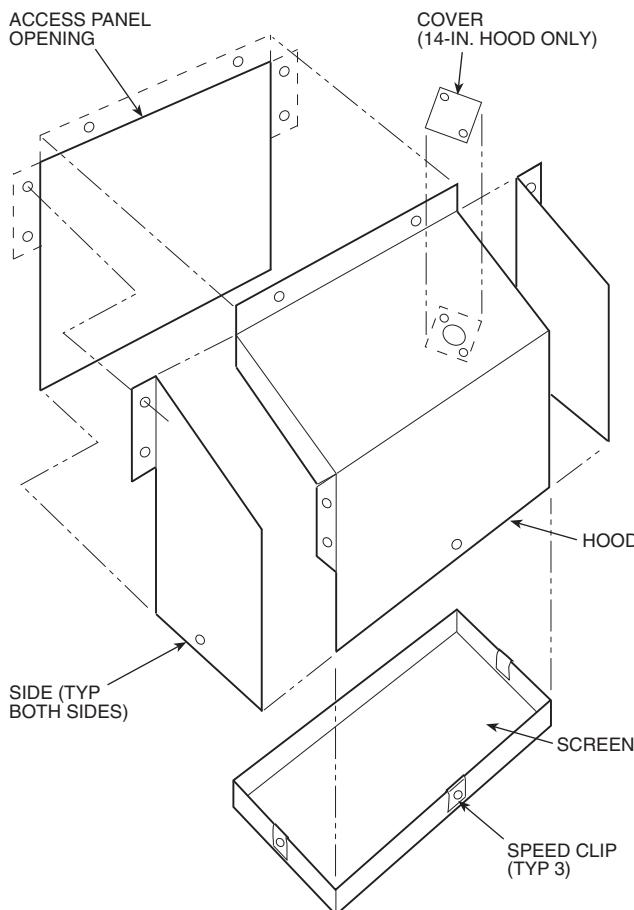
Inlet Hood Assembly (6-in. and 14-in.)
